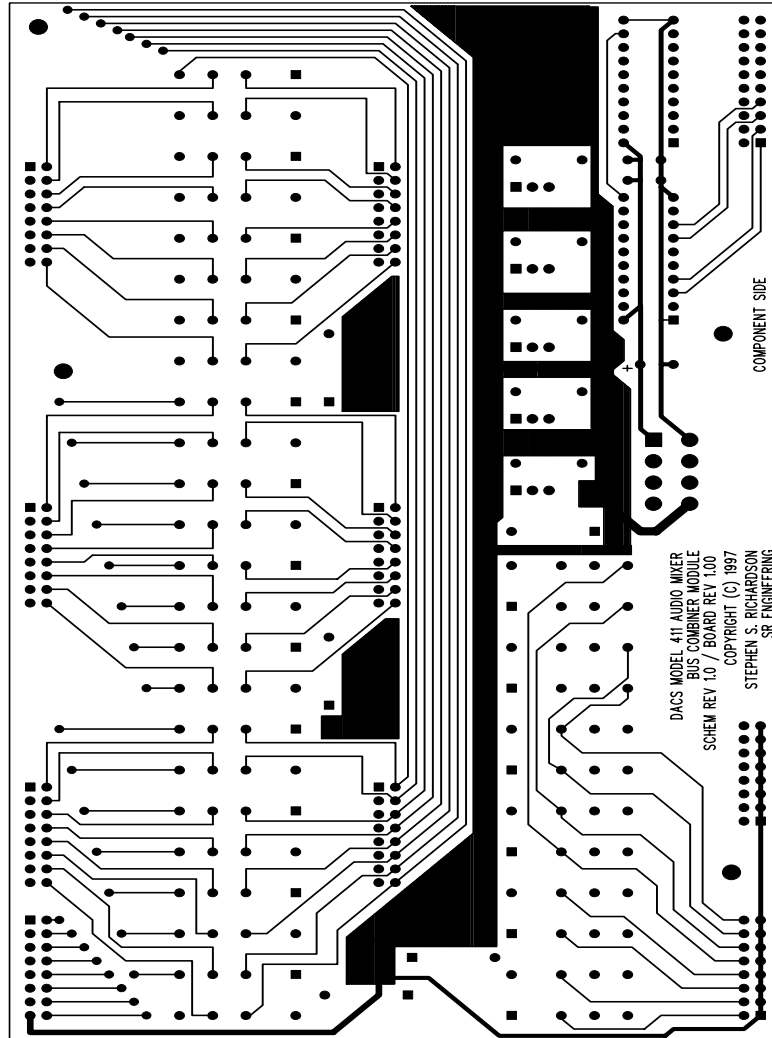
Audio bus switcher/combiner PCB, component-side routing.
